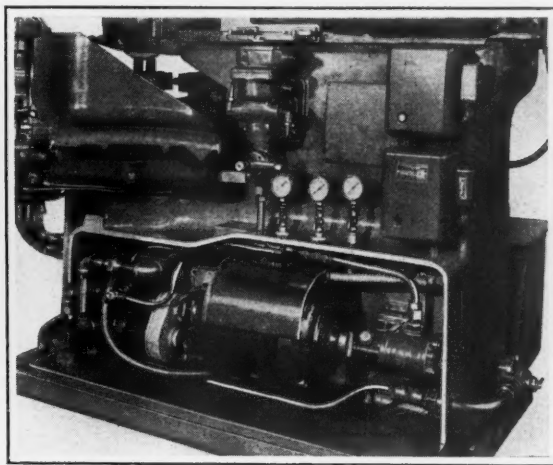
One Motor Drives Two Oil Pumps for the Hydraulic Mechanisms and a Coolant Pump
